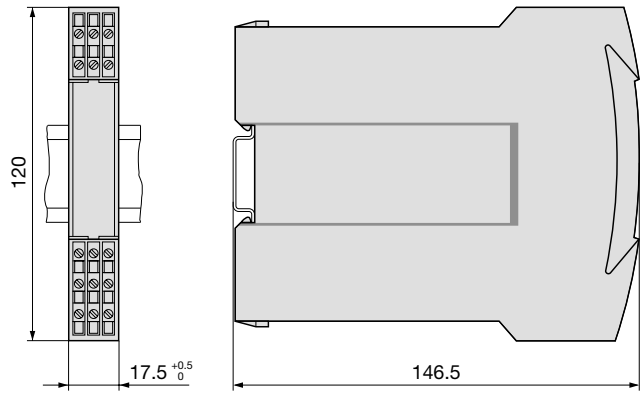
SINEAX B 811 in housing S17 clipped onto a top-hat rail (35 × 15 mm or 35 × .5 mm, acc. to EN 50 022).
